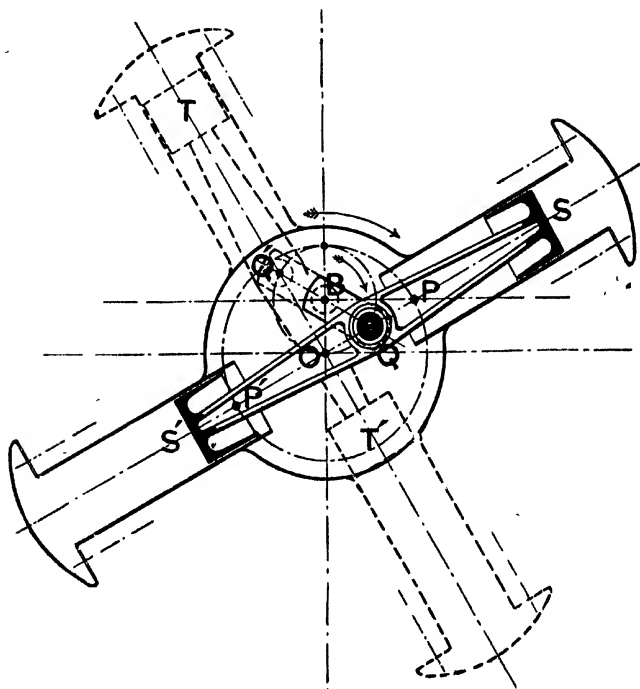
Diagram illustrating the Burlat rotary engine.
